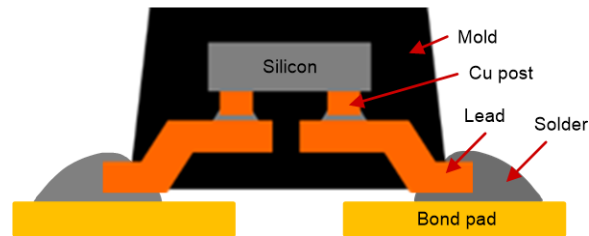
Cross Sectional Illustration of FC-SOT Structure and Solder Joints of Leads on Board
